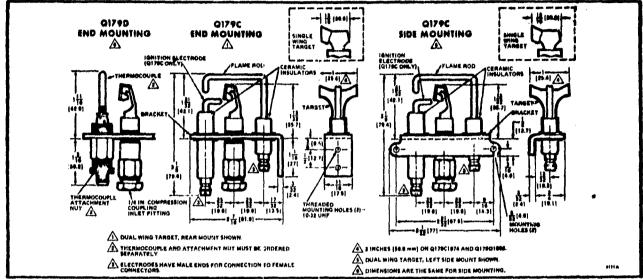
APPROXIMATE MOUNTING DIMENSIONS, IN INCHES [MILLIMETRES IN BRACKETS], AND ARRANGEMENT OF PARTS.
